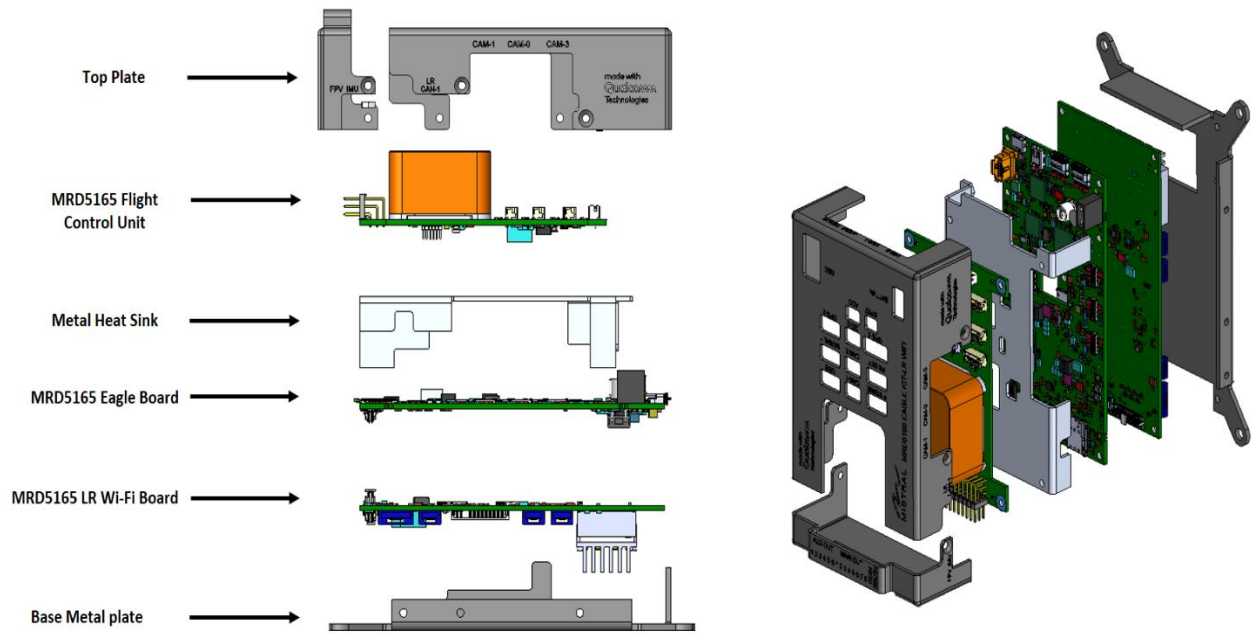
MRD5165 Eagle Kit LR Wi-Fi - Exploded view
